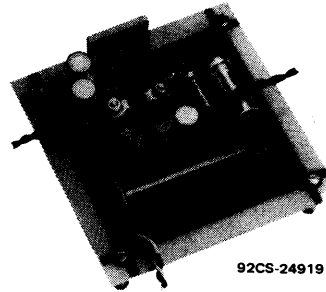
Bottom view of printed-circuit boards shown in Figs. 7 and 8.
